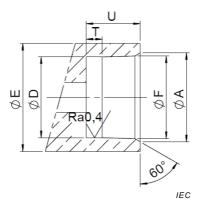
Gauge ring for socket outer contact (for dimensions, see Table 4)
